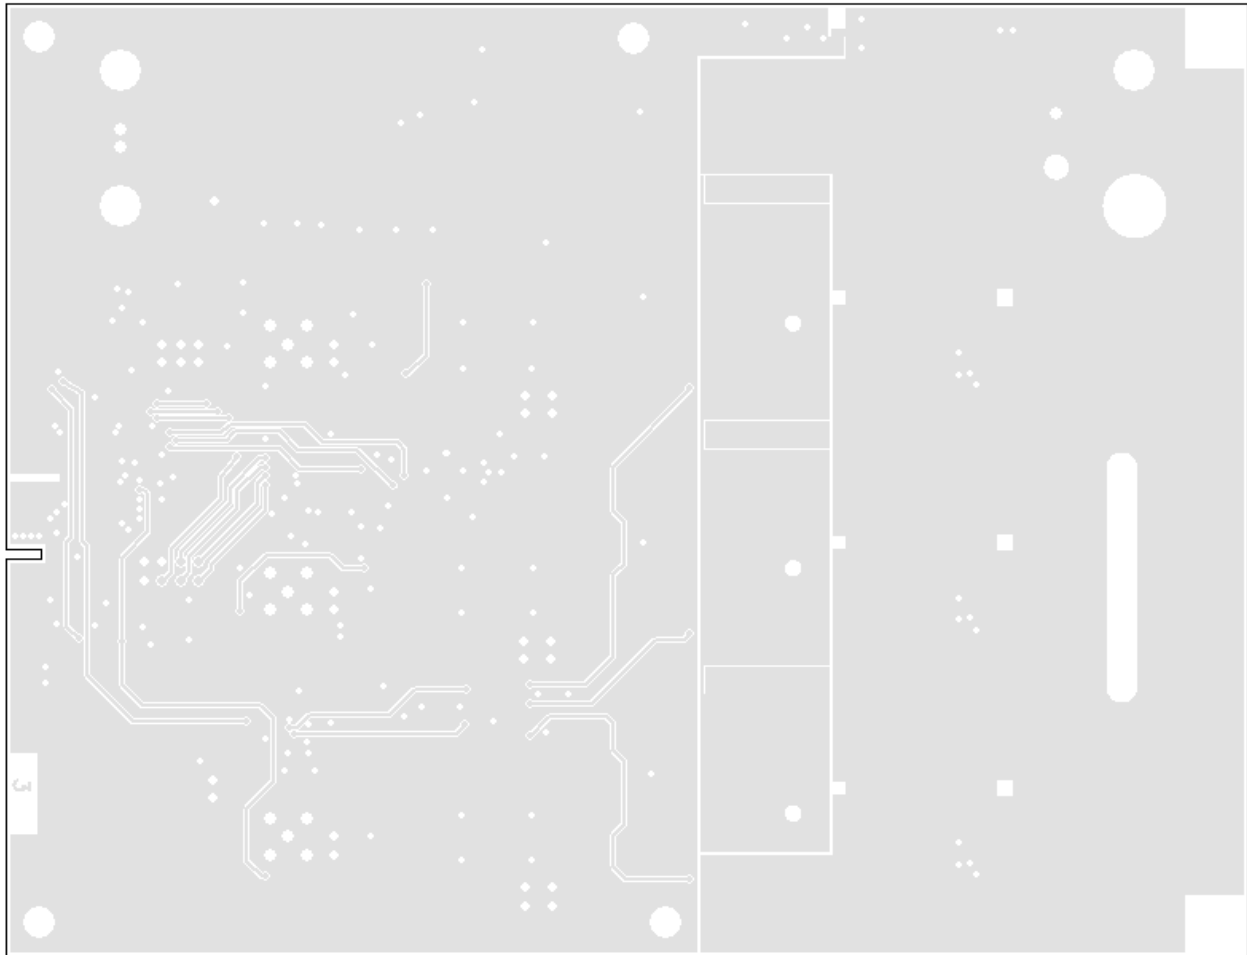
EPC7C006/FBS-GAM02 3-Phase Motor Driver Eval. Board Inner Layer 2 Copper Etch (1 oz).
